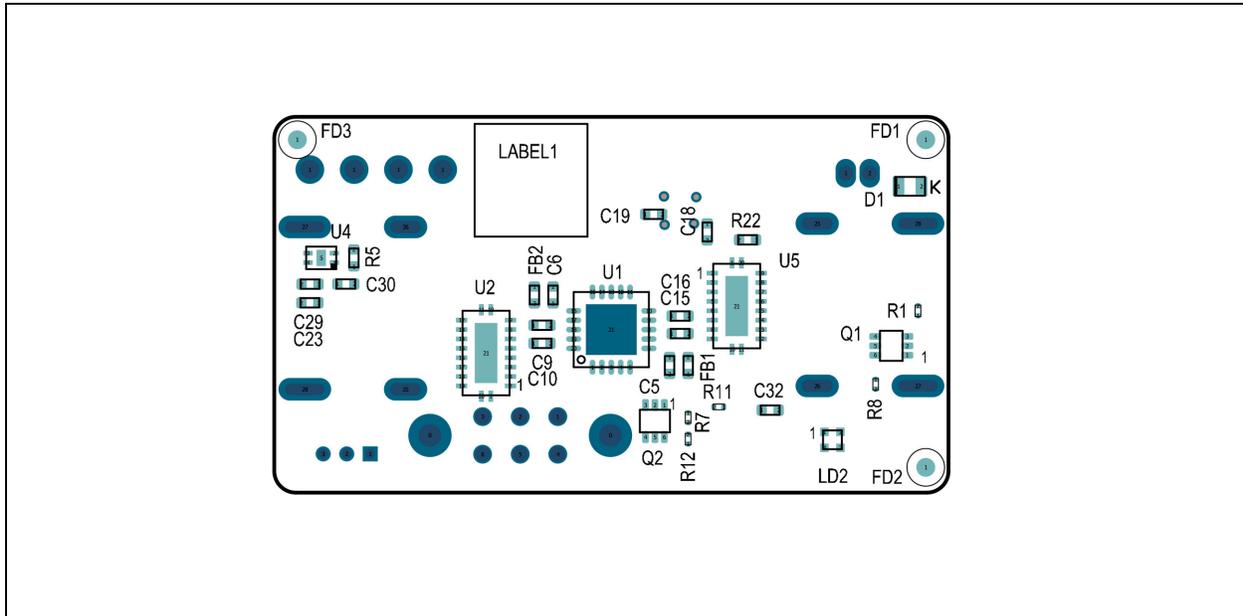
EV23B43A ASSEMBLY DRAWING (BOTTOM)
